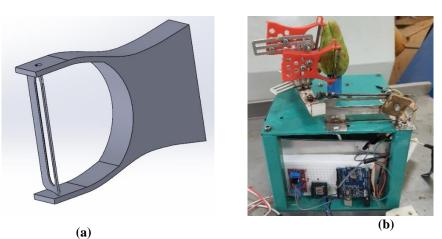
The cutting tool. (a) CAD model, (b) Cutting tools locating on the machine.
